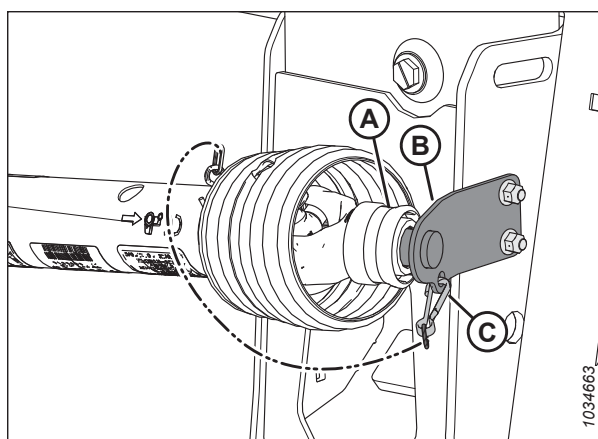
Driveline in Storage Position – Driveline B7038 or B7039
